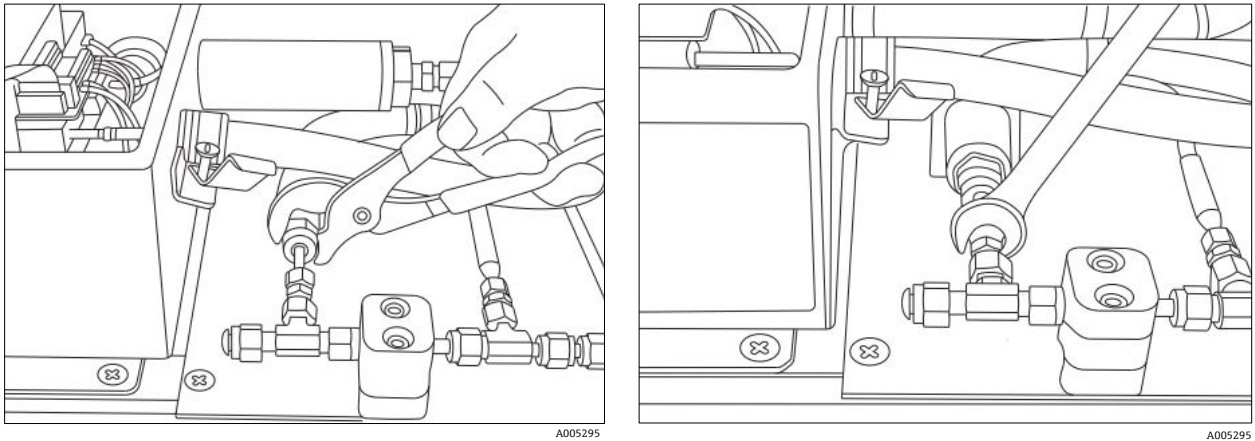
Loosen the cable gland cap (left) and remove tube nut (right)
